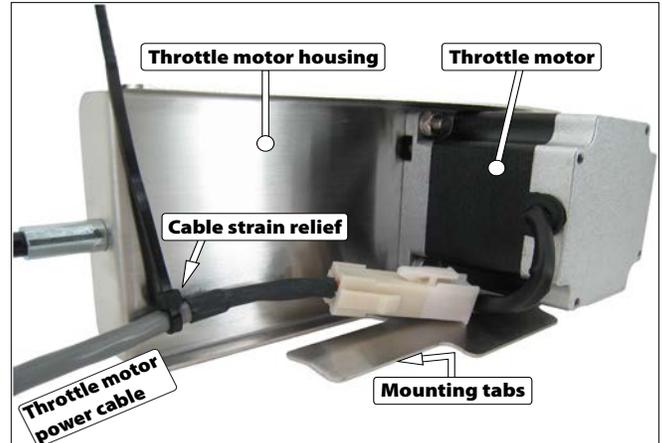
Throttle motor housing (back) showing throttle motor power cable connection and strain relief. Actual connectors may be different than shown. Make sure to fully latch connectors.
